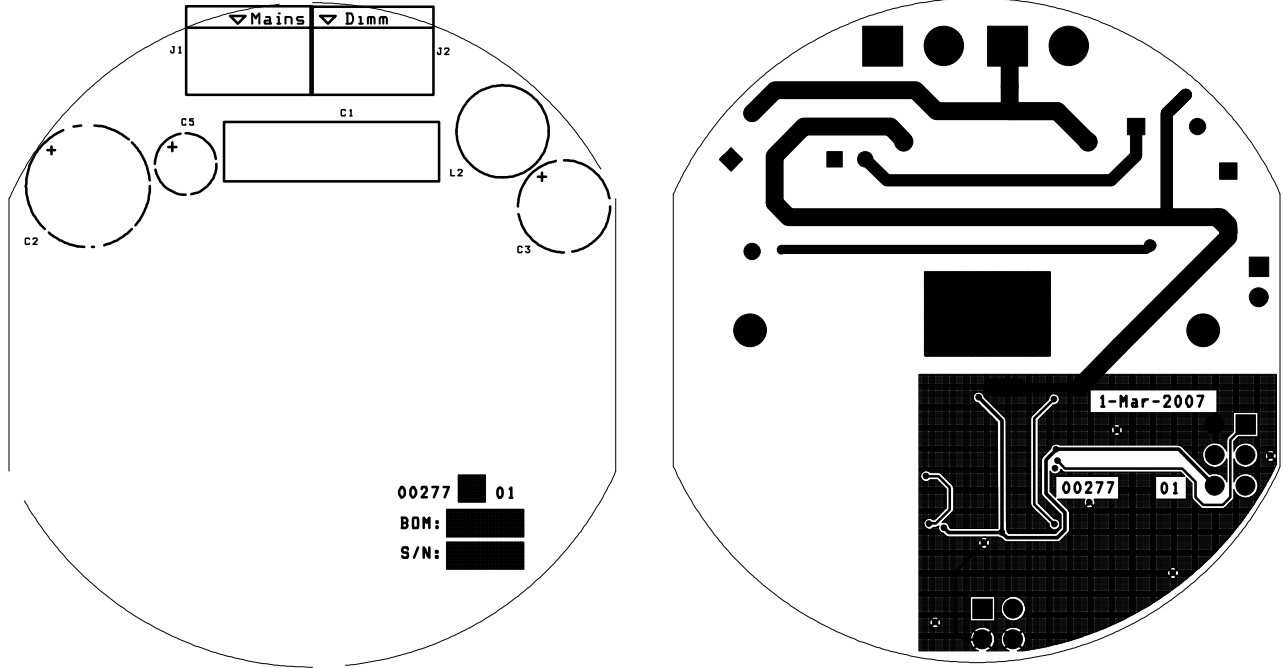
Intelligent Outlet Version 1, Parts Placement and PCB Layout, Bottom Side
